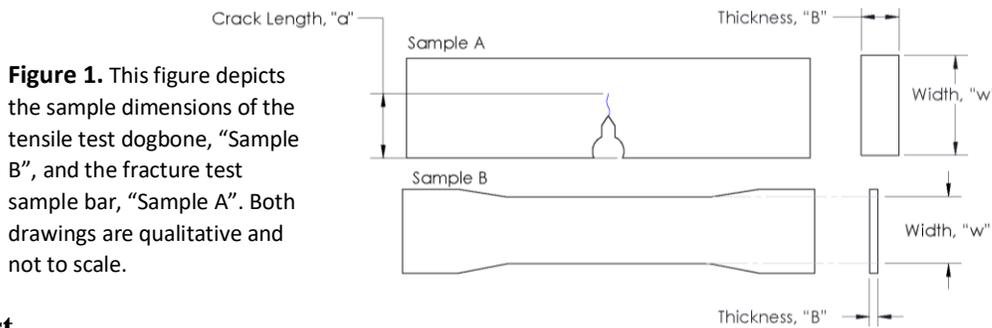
This figure depicts the sample dimensions of the tensile test dogbone, “Sample B”, and the fracture test sample bar, “Sample A”. Both drawings are qualitative and not to scale.
